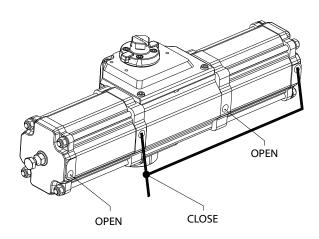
Pneumatic actuator type A with two cylinders and schematic drawing of the to-connect air pipes (single acting - spring to open A-SO). The ports "2 / open" are equipped with silencers
